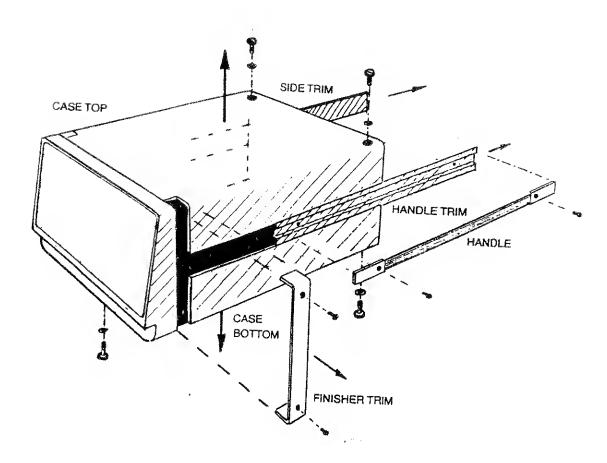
Removal of trims, handle, and top and bottom cases.
